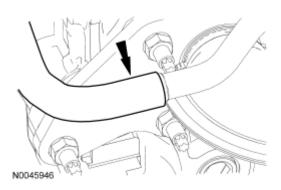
Locating AIR Valve Vacuum Supply Tube Courtesy of FORD MOTOR CO.
